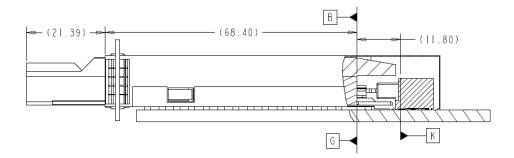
Side view of a 1x1 cage with vertical cage dimensions
